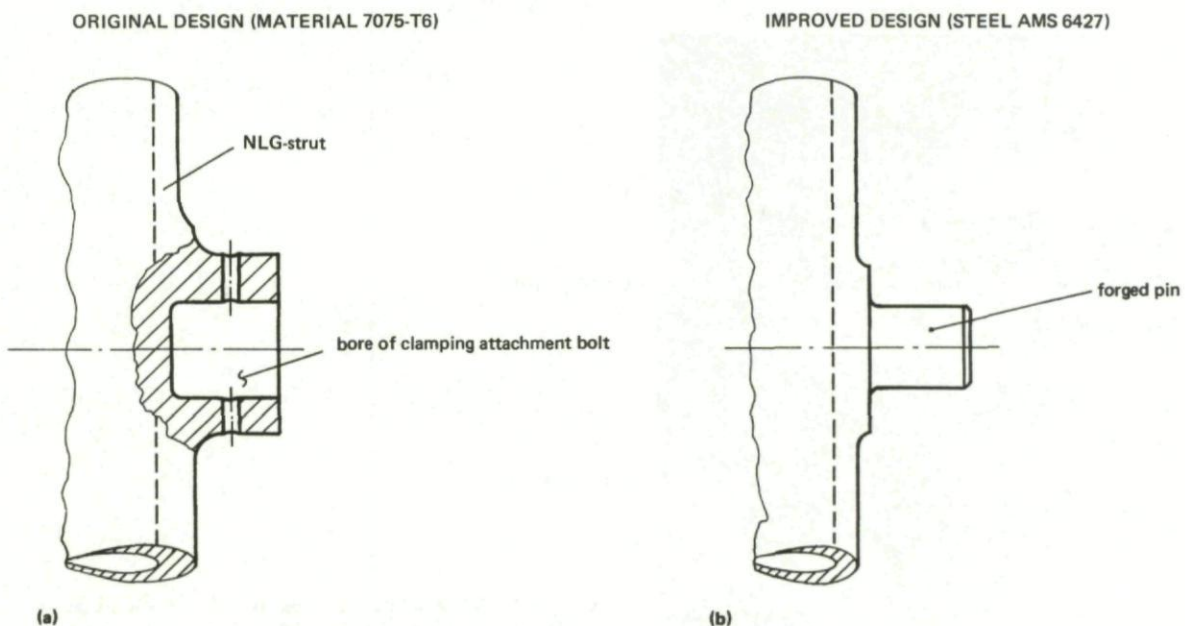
Design details of the nose landing gear strut, case history 13-7.
